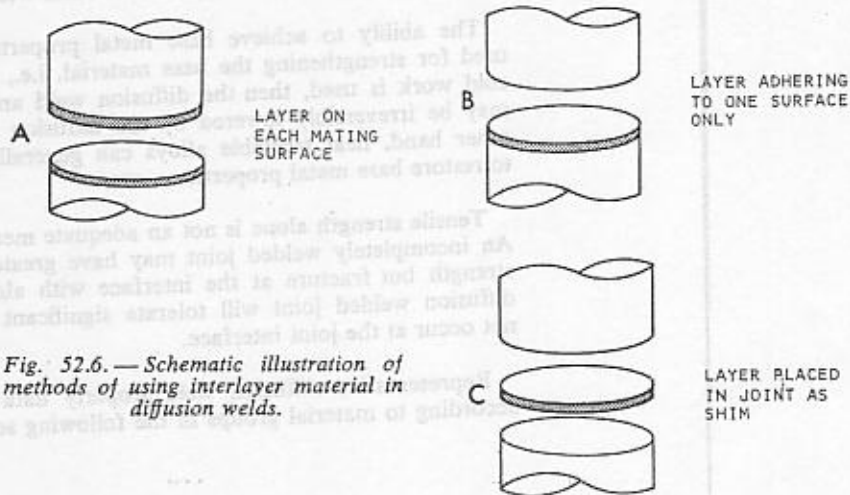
Schematic illustration of methods of using interlayer material in diffusion welds.
